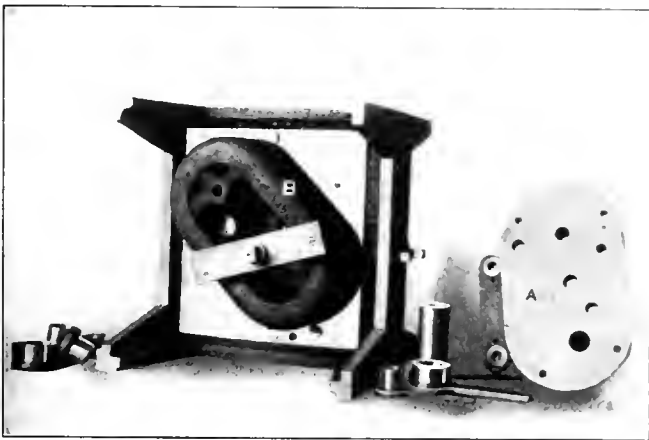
Rear View of Drill Jig shown in Fig. 75, with Cover to be Drilled in Place.
